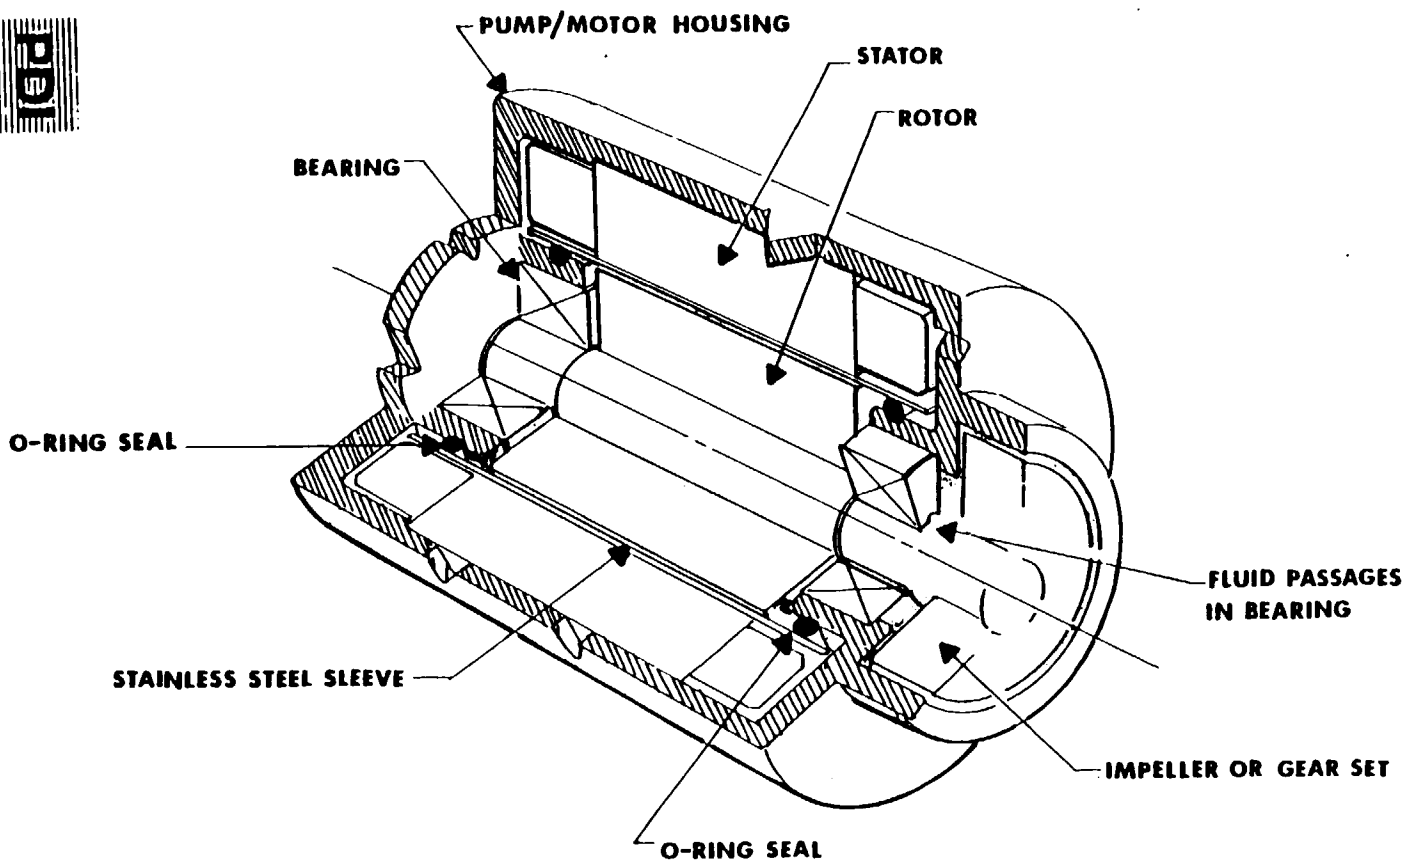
, Cross Section, HFS's Motor Assembly
